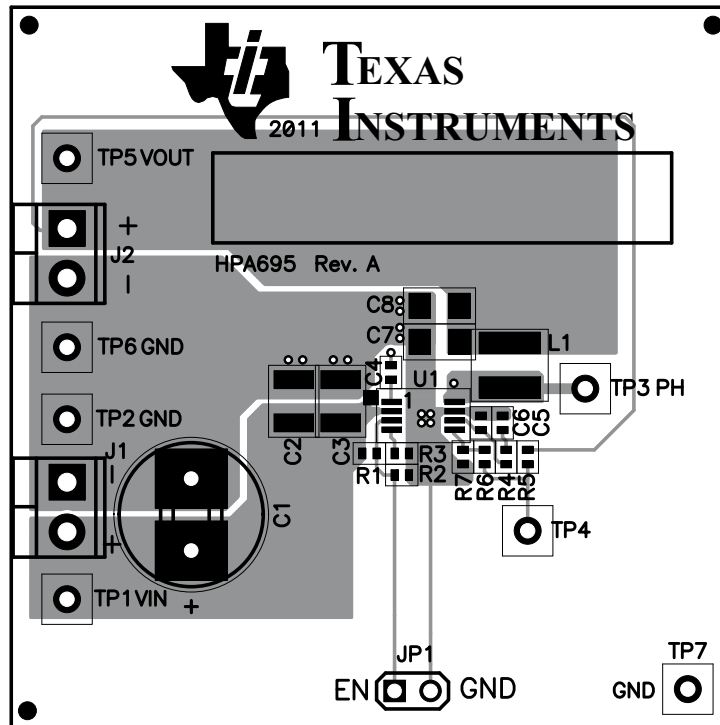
TPS54062EVM-695 Top-Assembly Layout
